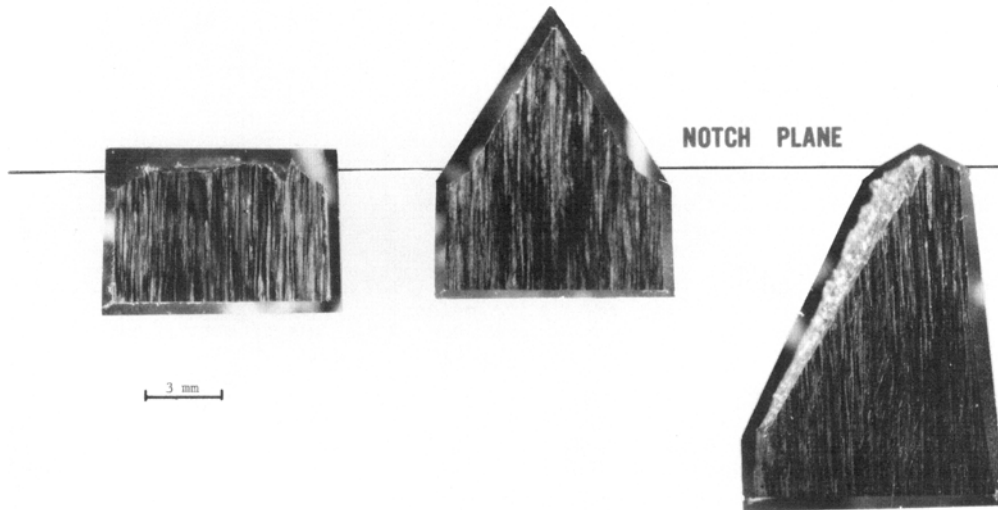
Three types of macrofracture mode: (a) slant fracture, (b) vee fracture, and (c) flat fracture.
